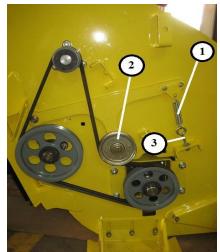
RH Side of Header Key 1 – Spring Key 2 – Tensioner Pulley Key 3 – Eye Bolt
